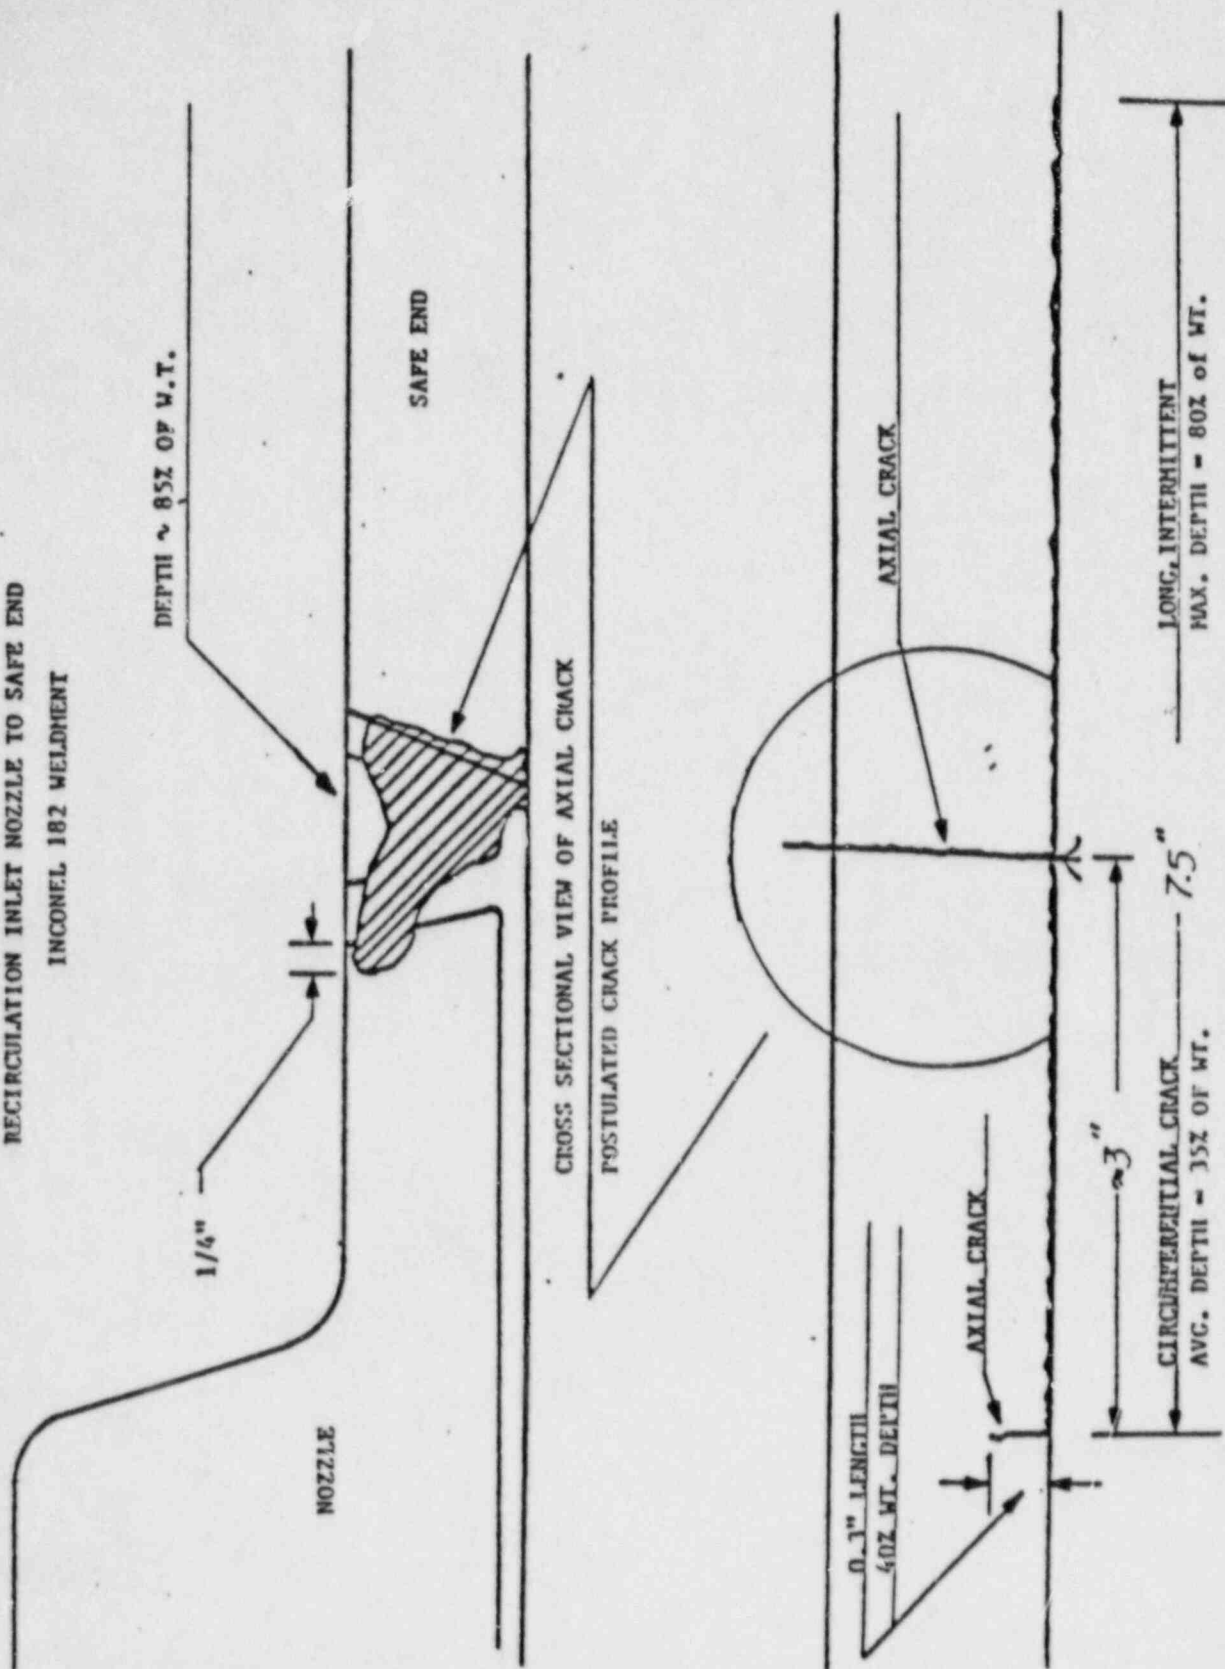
Crack Profile in Low Alloy Steel BWR Nozzle
